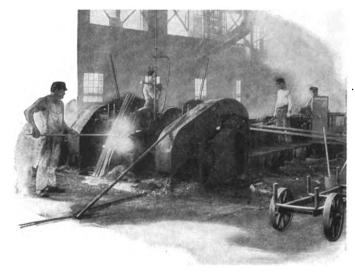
CENTERING BILLETS BEFORE HEATING FOR PIERCING MILL
